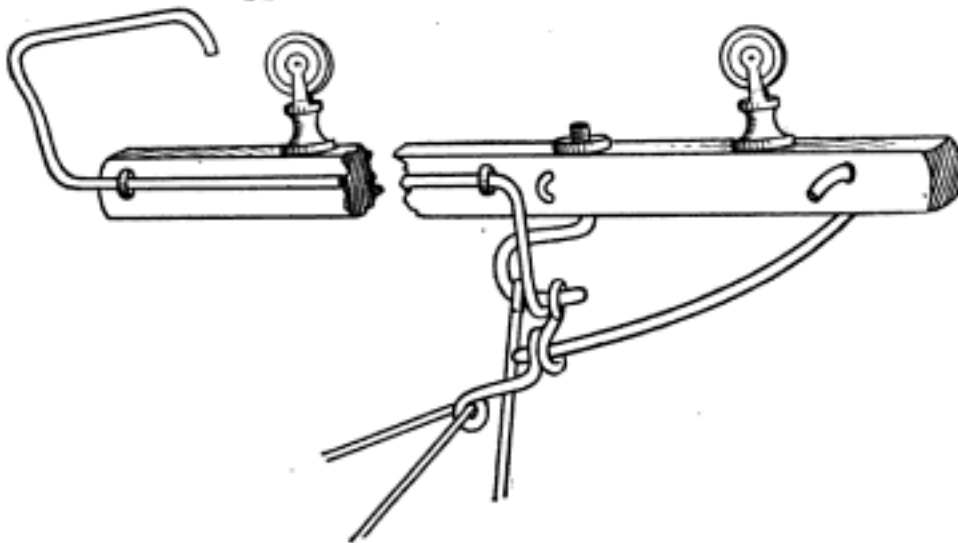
Tripping Mechanism of the "Traveler." This is a Part of the Device (but without the Wings) Shown in Fig. 3.
